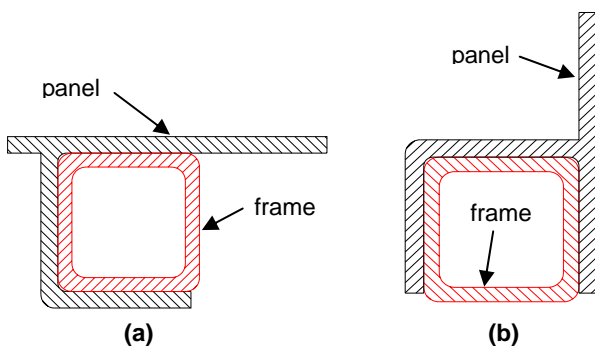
Close-up view of the cross sections of locator and frame: (a) section A-A and (b) section B-B.
